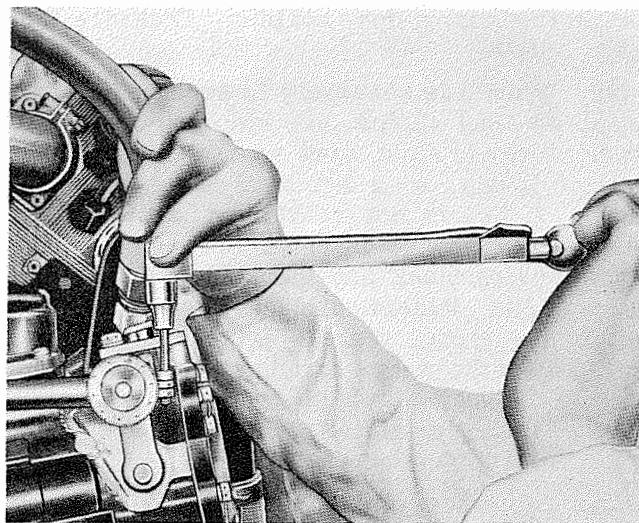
Tightening Clamp Screw at Cam End of Synchronizing Rod
